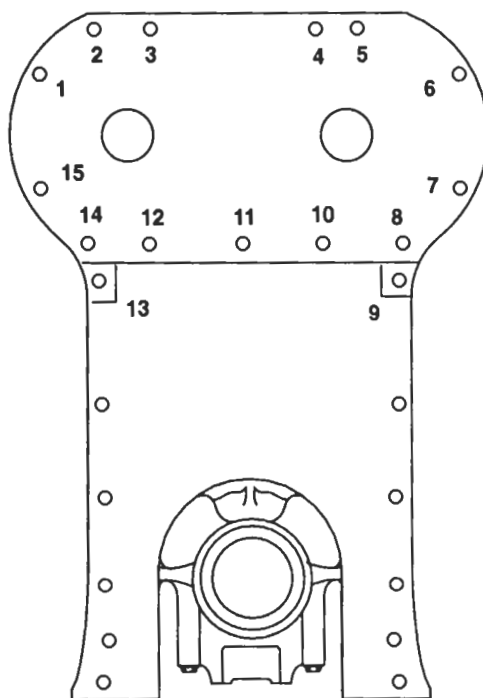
Balance Weight Cover Bolt Tightening Sequence
